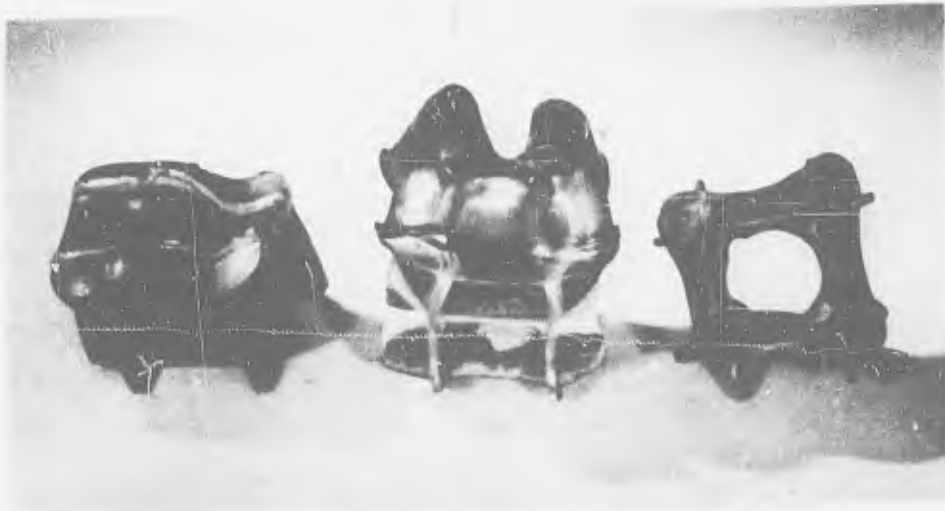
Upper and lower views of 7075 (75S) aluminum alloy forging 18E made with the No. 5 punch (Fig. 20), the No. 5 die inserts (Fig. 7) and the lifting plate extraction device (Figs. 17, 18, 19, and 20). For forging details, see Table I, No. 33.
